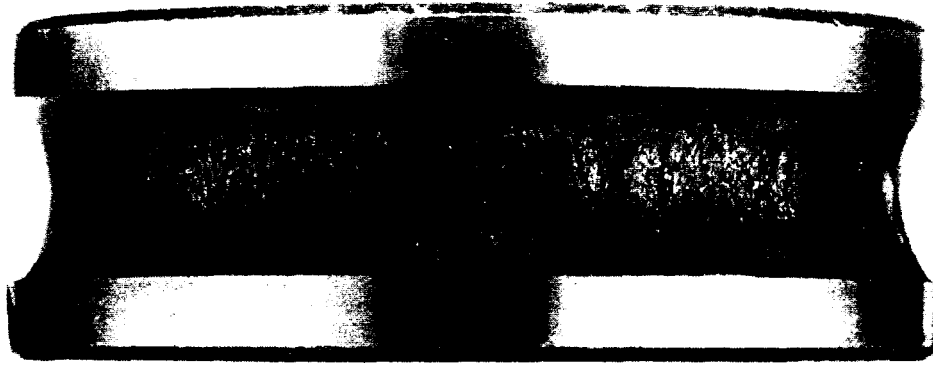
FAILED ROLLING CONTACT BEARING, SHOWING DAMAGE TO INNER TRACK
